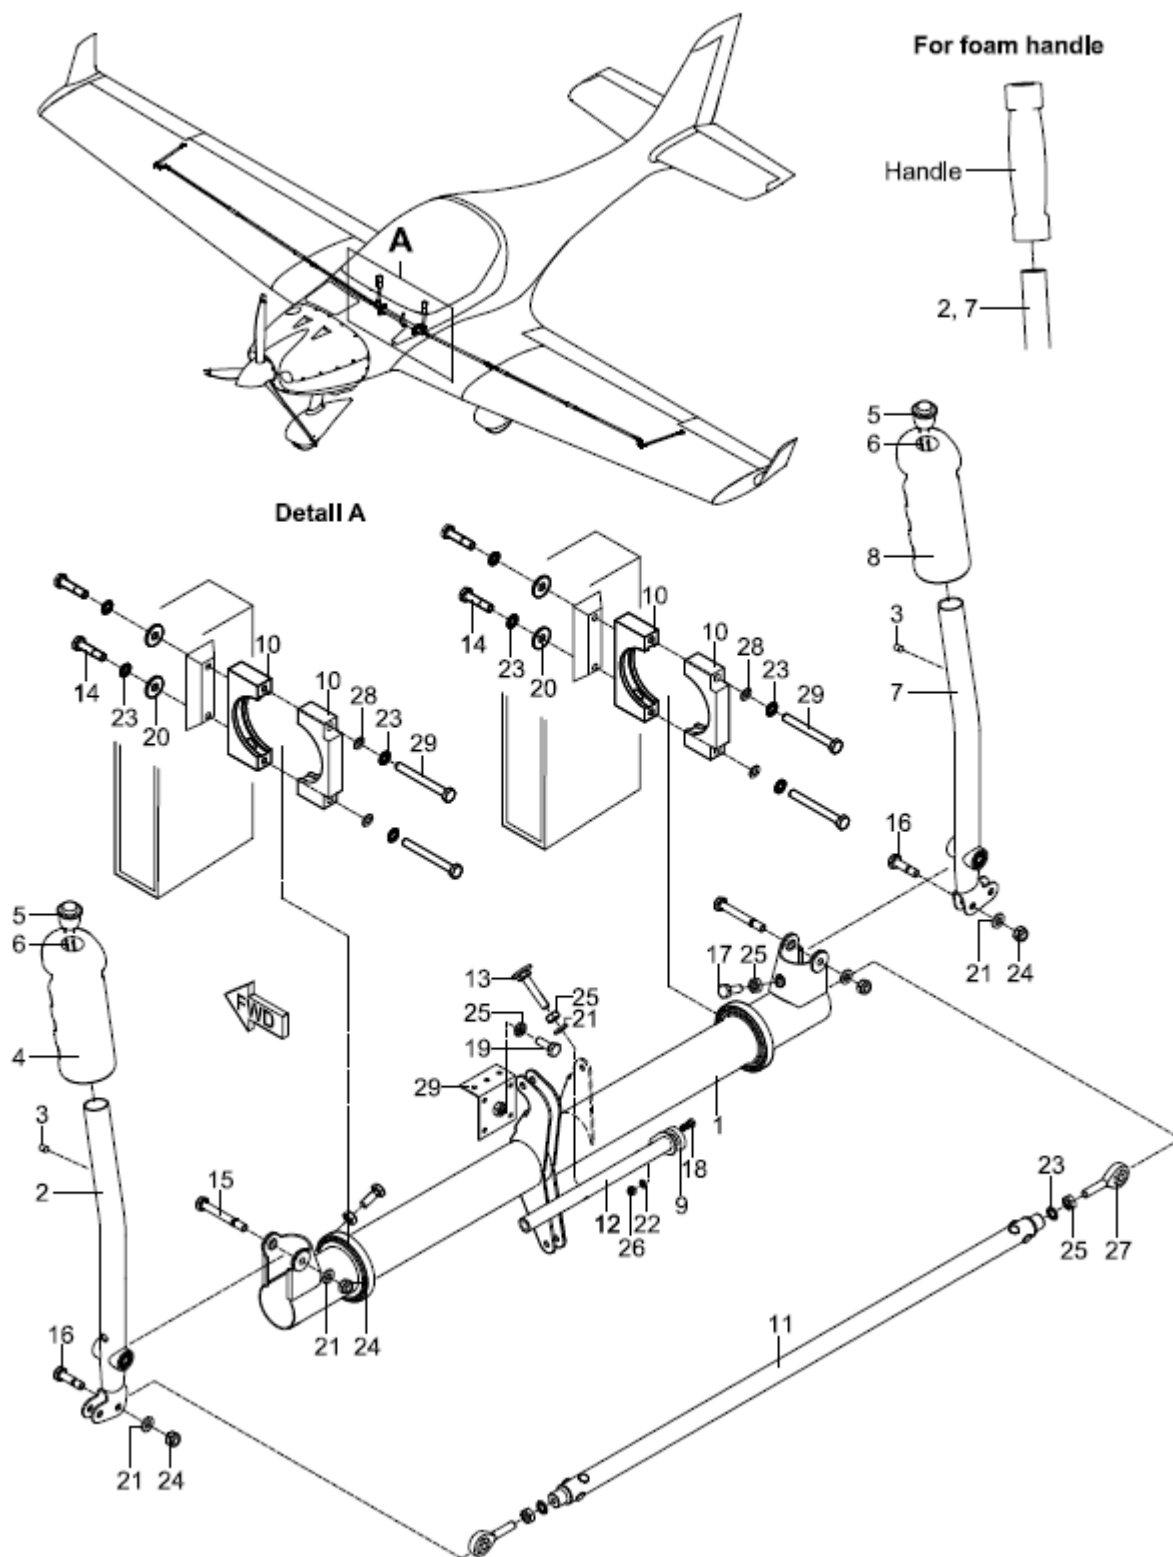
Torsion Tube with Control Sticks Removal / Installation (page 1 of 2)
